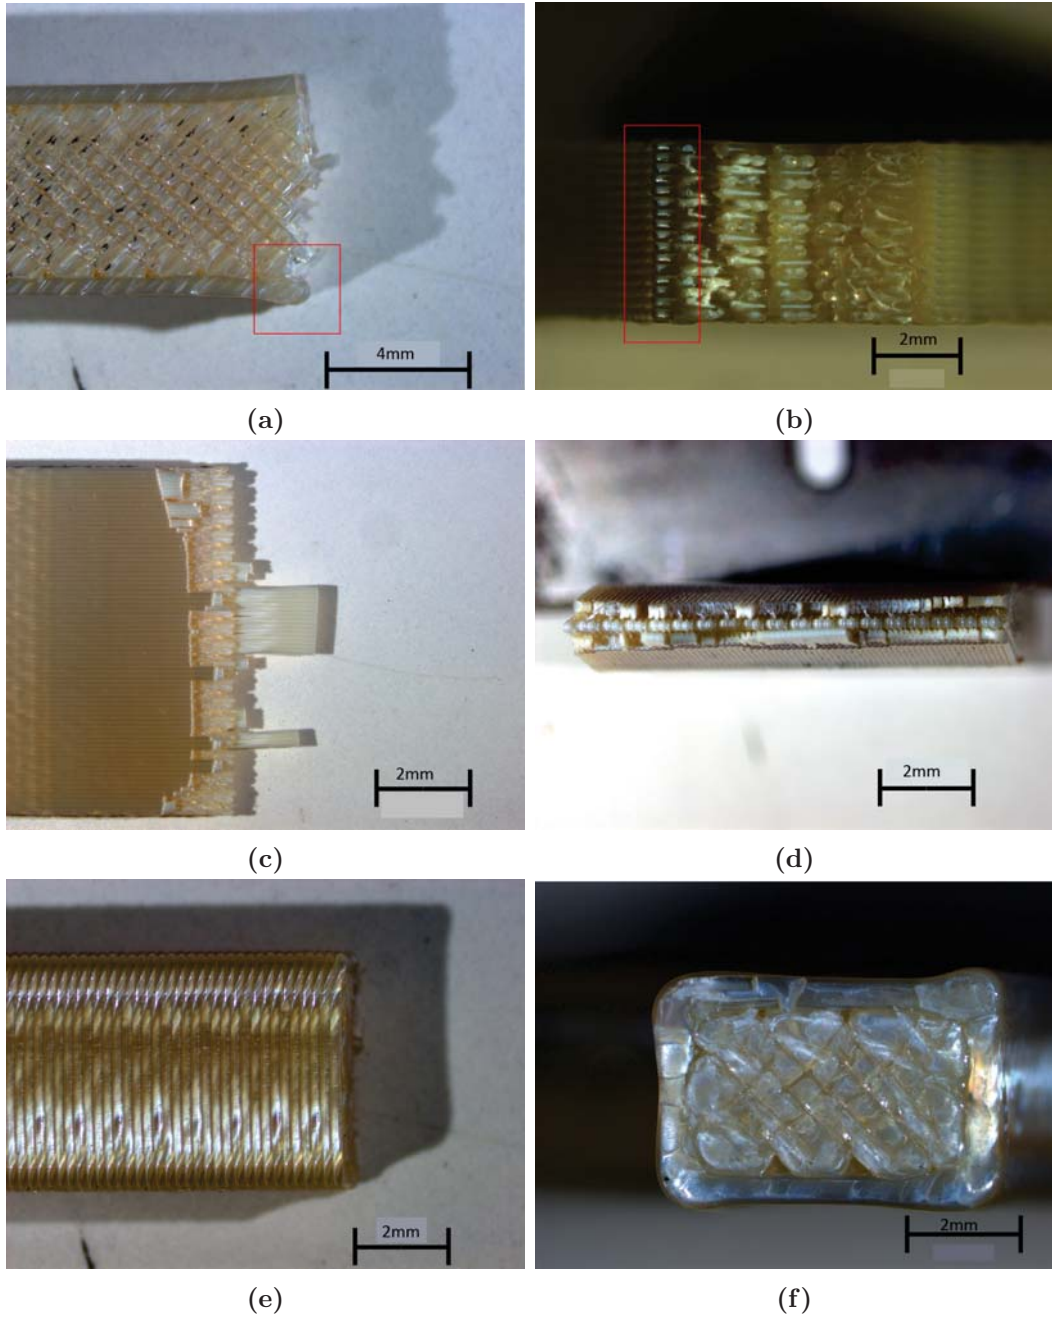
Side and cross-sectional views at the point of failure on tensile specimens manufactured at Stratasys. (a) Side view of XY specimen failure location due to the nozzle path. Note there was no neck formation in the boxed section. (b) Cross sectional view of XY specimen (c) Side view of YX specimen (d) Cross-sectional view of YX specimen (e) Side view of ZX specimen (f) cross-sectional view of ZX specimen
